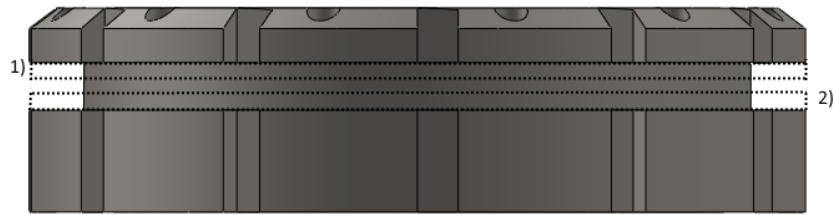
The primary piston head and the piston ring position. 1) during compression; 2) during extension.
